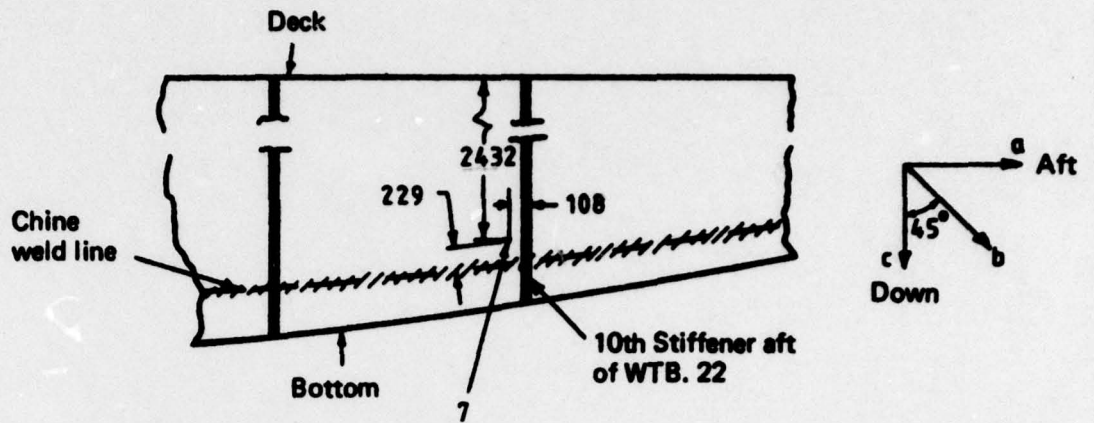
ROSETTE GAUGE No. 7 ON STARBOARD SIDE OF HULL
